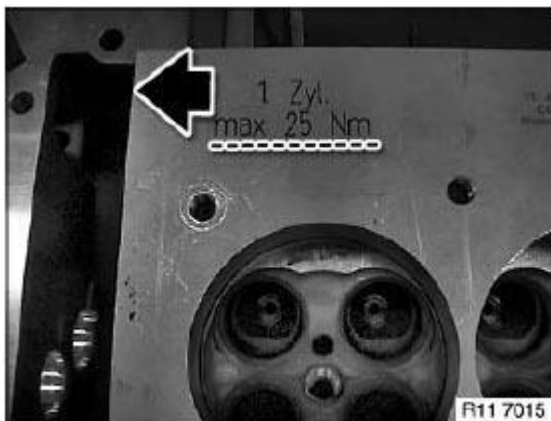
Identifying Special Tool 11 4 341 Securing Bolts 11 4 345 Tightening Torque 25 Nm
